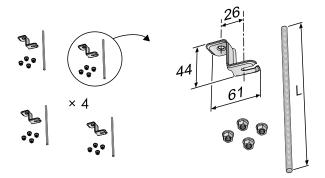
Assembly piece SYST MS M6-1, ceiling mount and threaded rod
